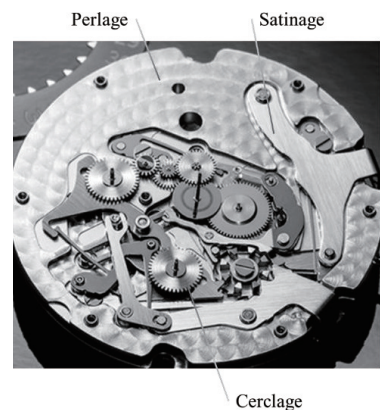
Example of surface finish of parts comprising Cal. 9SC5.
